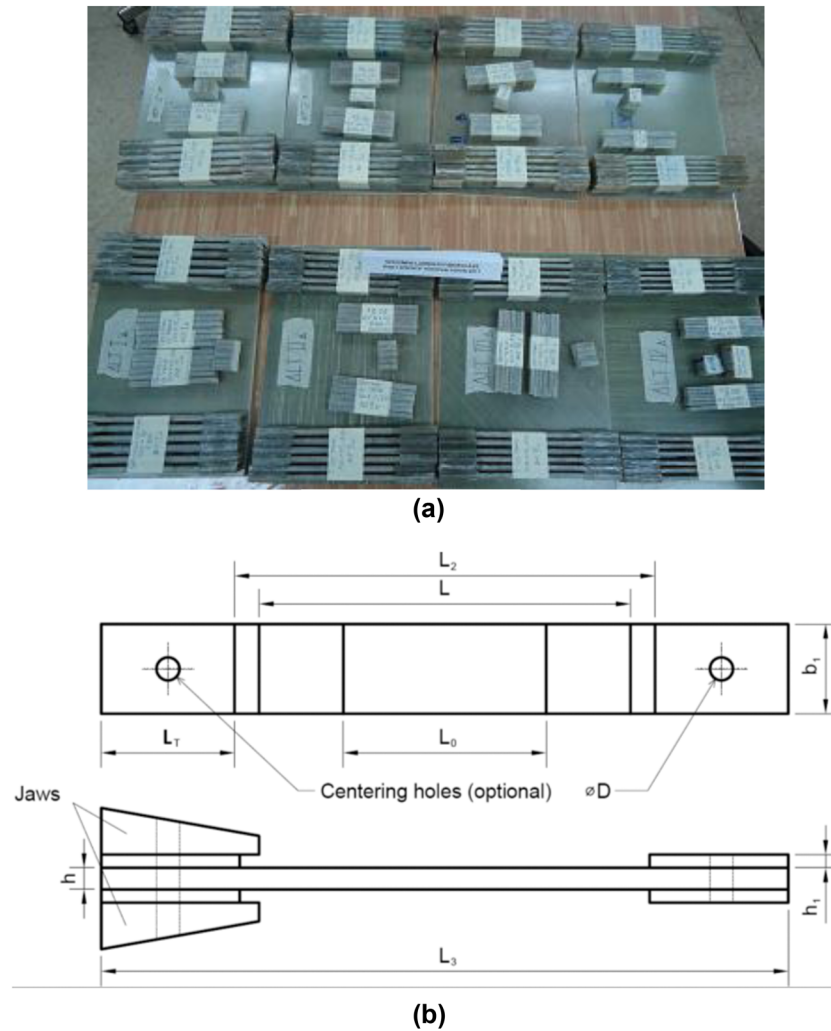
(a) Tensile and bending specimens. (b) Dimensions of the tensile test specimen.
